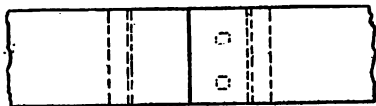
Solid Ring Cut and Fitted with Clamp.
